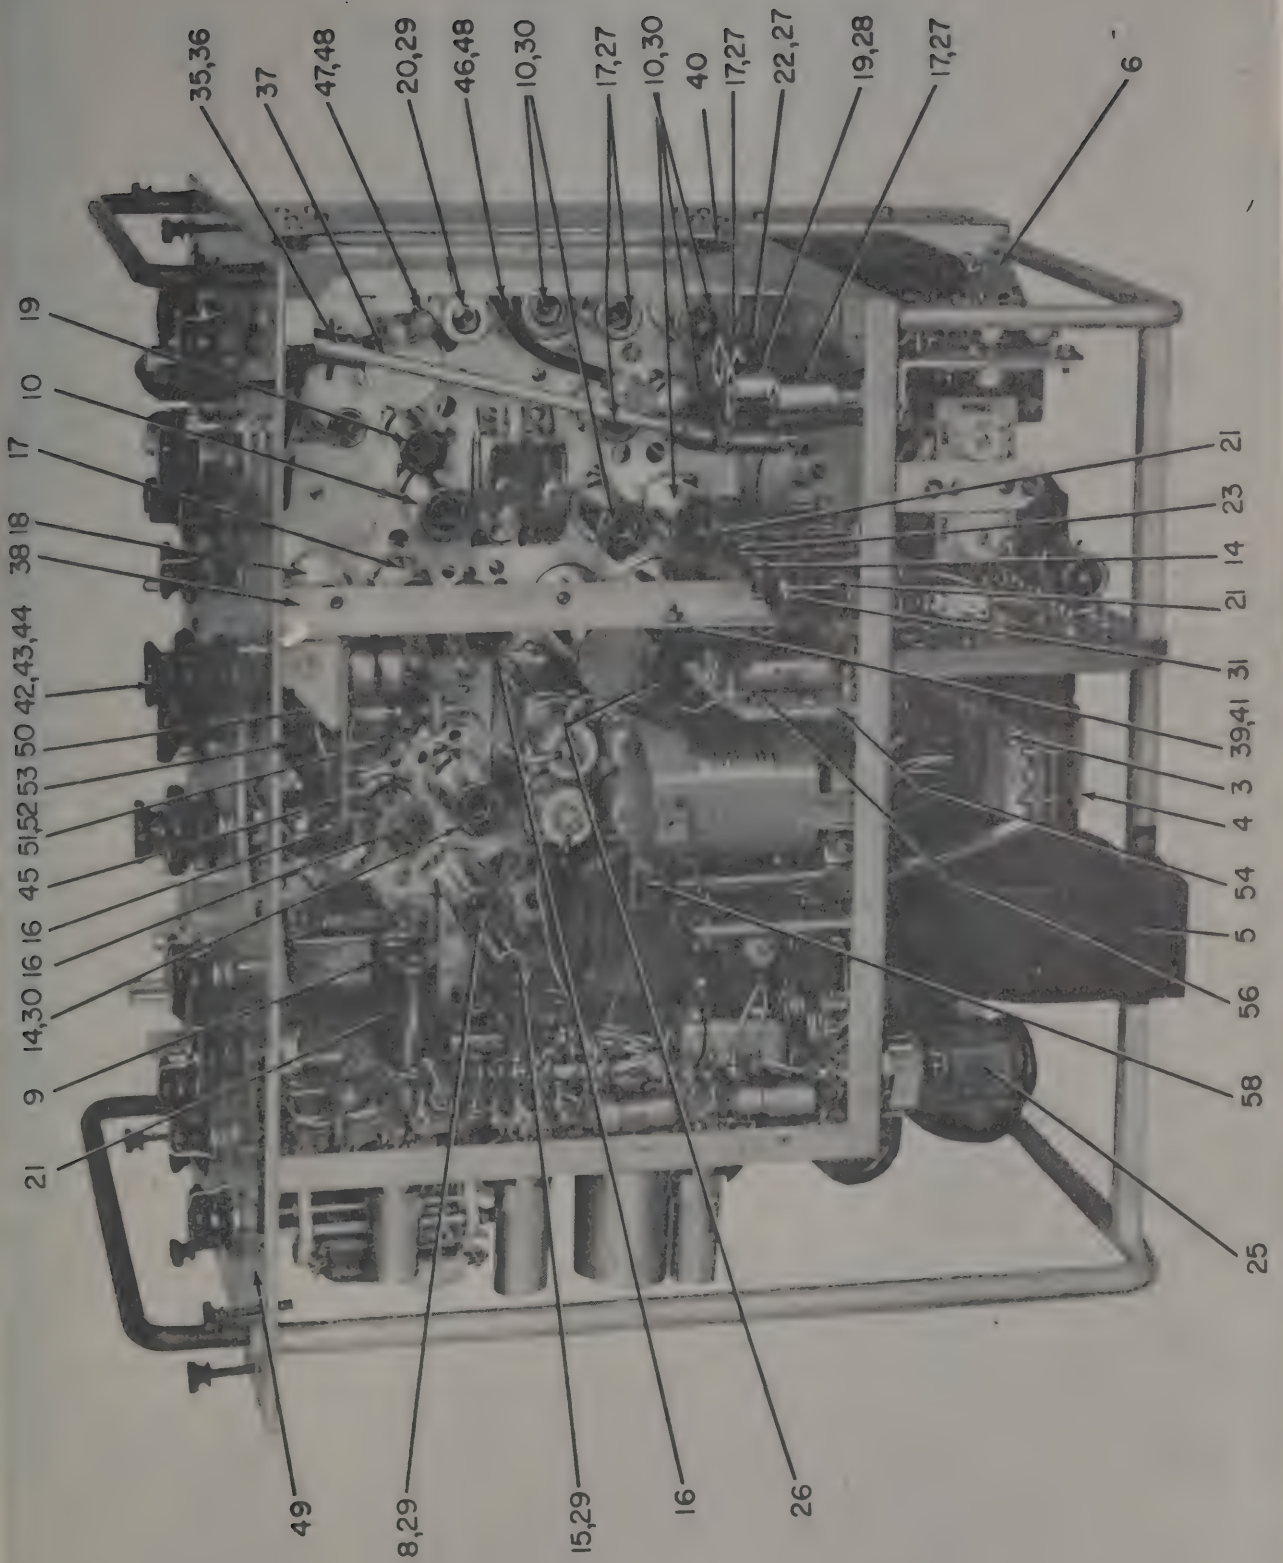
Pulse Generator Assembly, SG-30/UP (Sheet 2 of 3)
